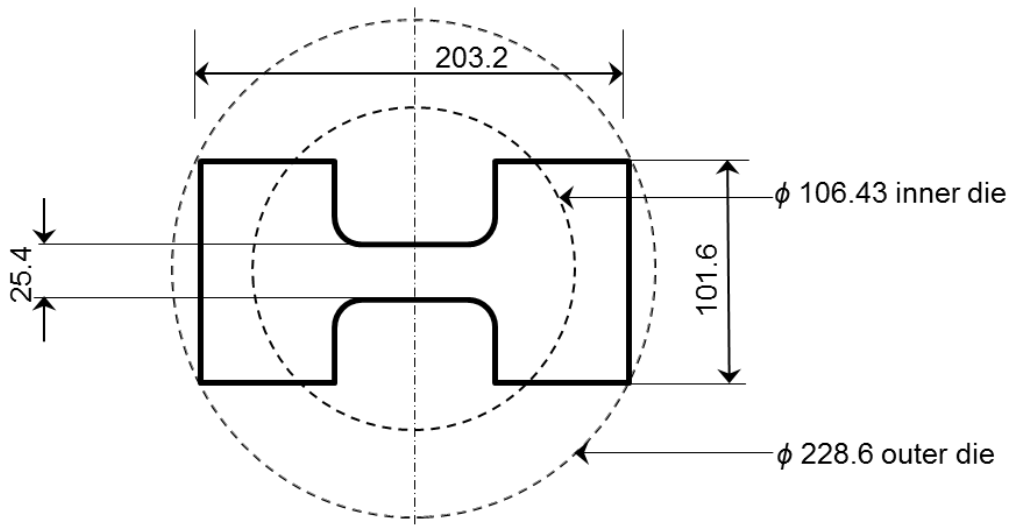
Schematic showing the positioning of the 25.4 mm (1 in.) dog-bone specimen relative to the die outline (all dimensions are in mm).
